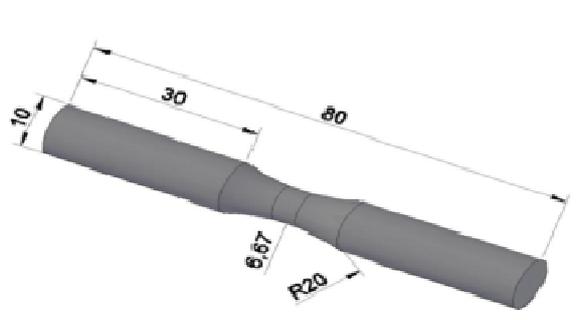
Fatigue specimen dimensions (DIN 50113) (all dimnsions in mm).
